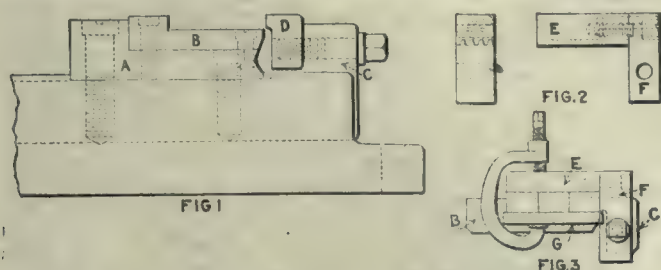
END SECTION OF WORK HOLDING VISE. FIG. 2—THE LOCATING GAGE. FIG. 3—METHOD OF ATTACHING GAGE
